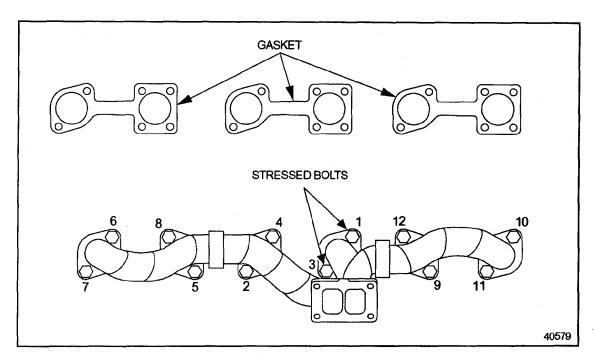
Three-Piece Exhaust Manifold and Gasket Configurations
